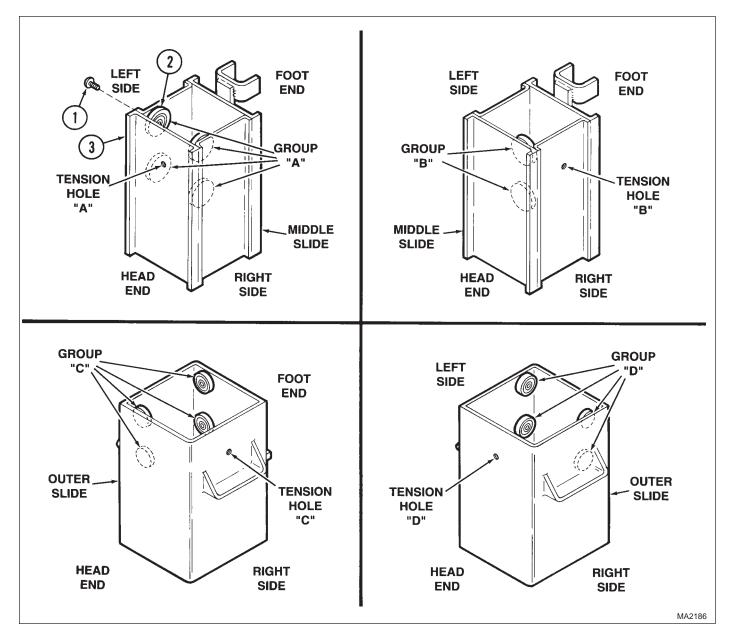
Eccentric Bearing Removal / Installation / or Adjustment Use this illustration for units with Serial Numbers DN1032 thru Present
